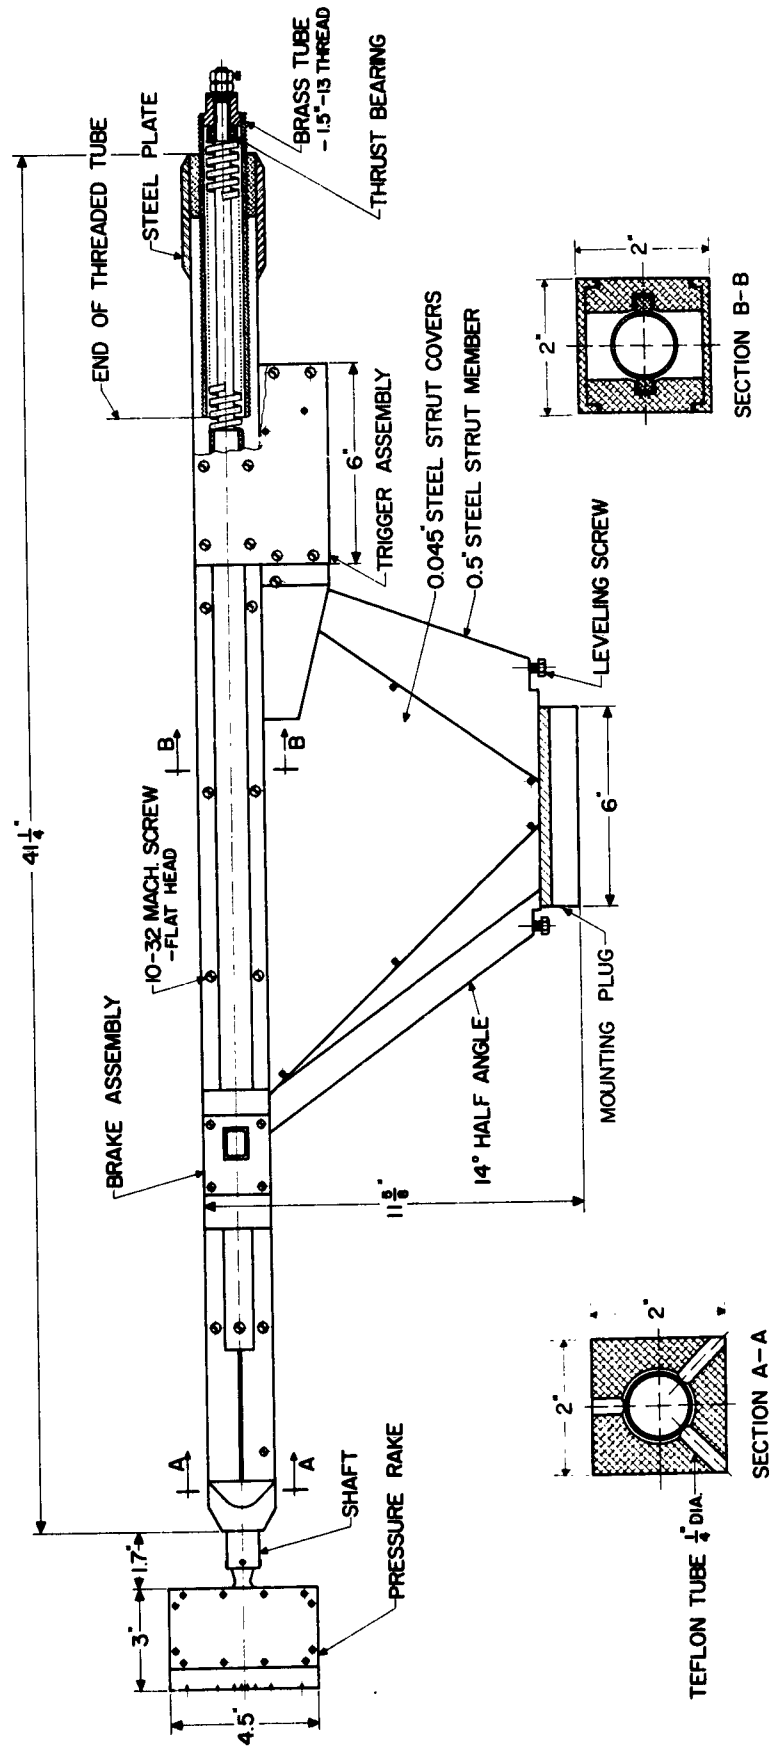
AXIALLY TRAVERSING PROBE AND MOUNTING STRUT.
